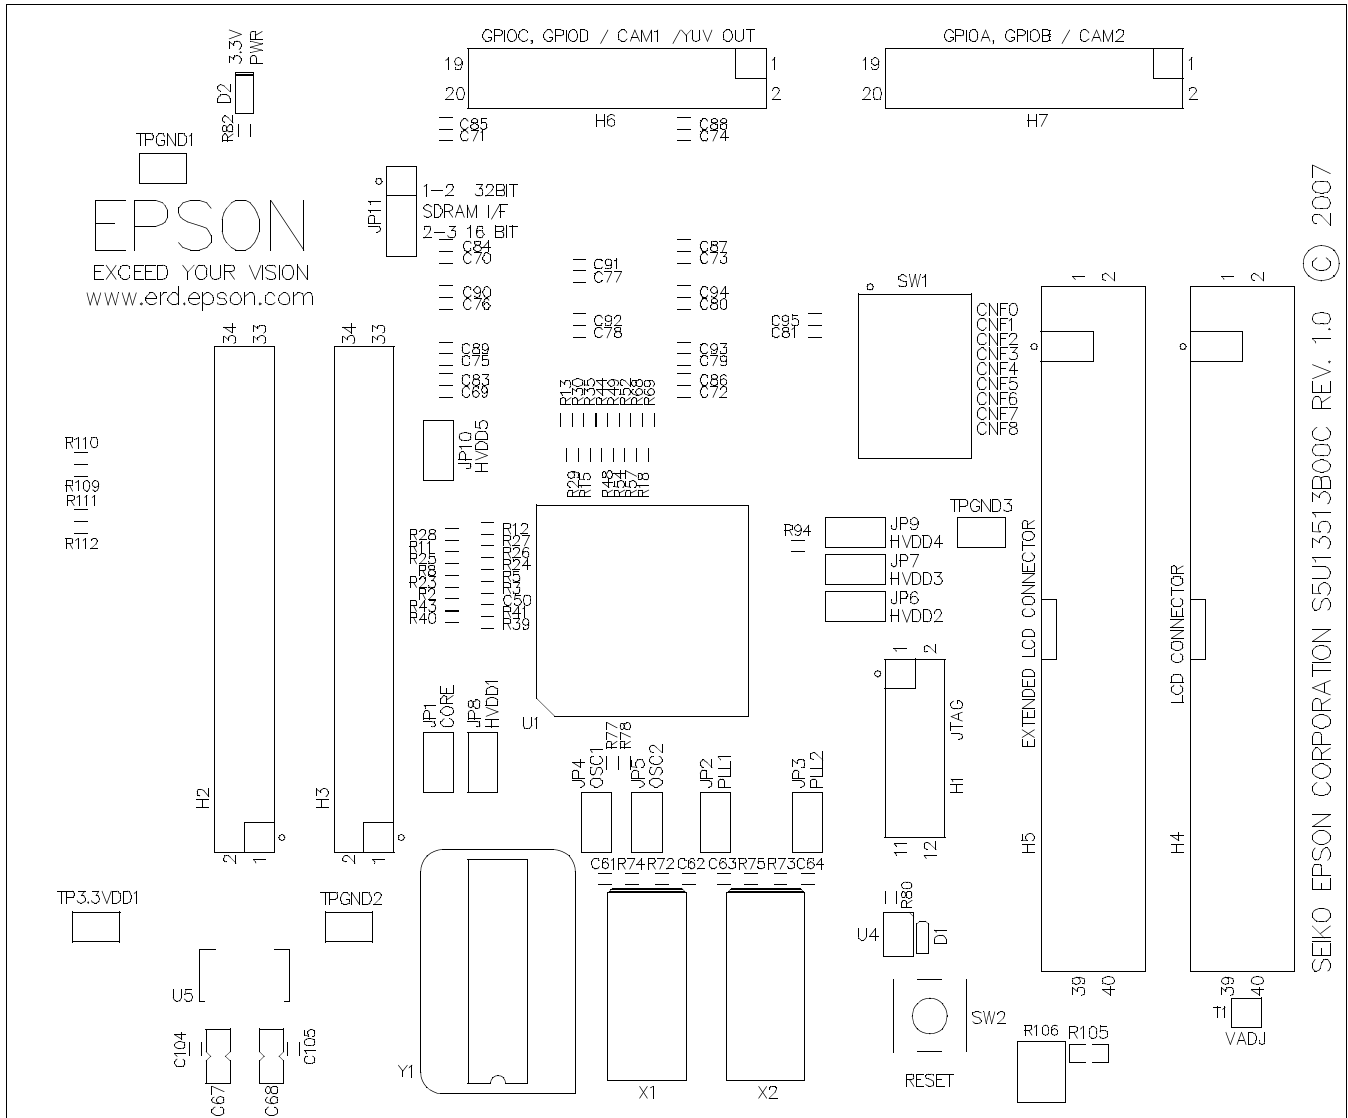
S5U13513P00C100 Board Layout - Top View
